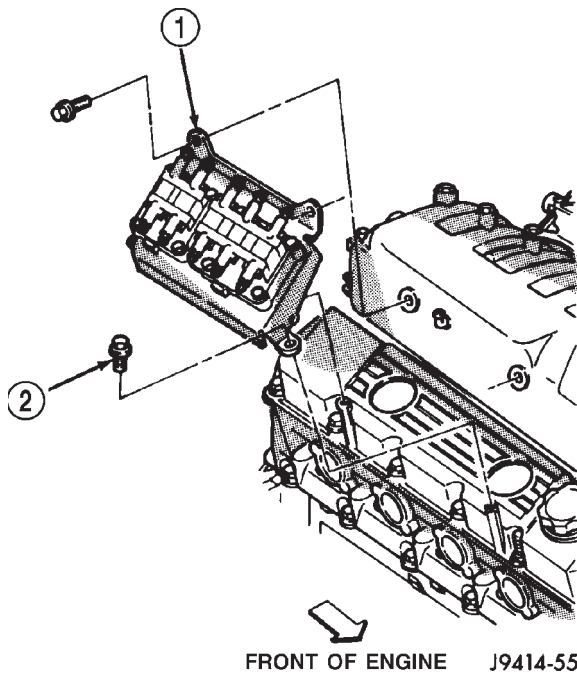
Spark Plug Wire Heat Shields (Left Side Shown)
